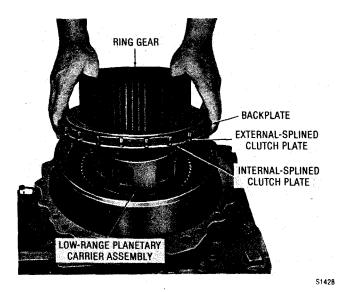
Removing low-range planetary ring gear (TRT 2221-3, 2421-3 with underdrive)
